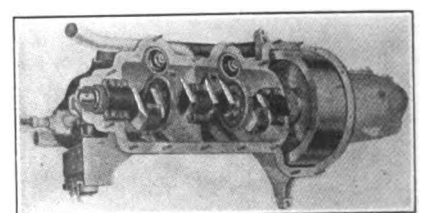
SHOWS THE SILENT MOTOR FROM THE BOTTOM
